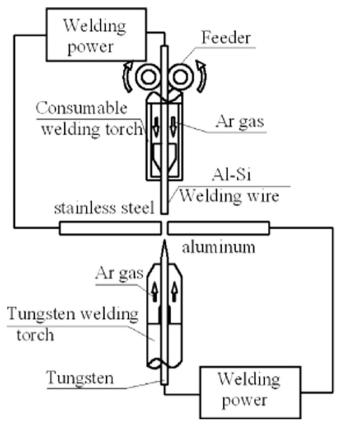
Schematic diagram of the MIG-TIG double-sided arc welding-brazing process.
